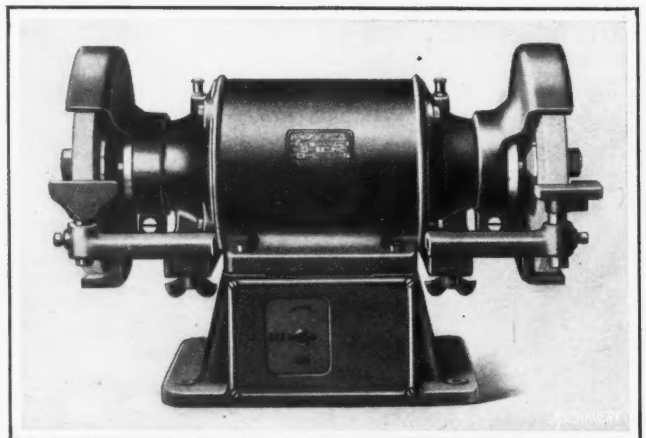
Hisey-Wolf Bench Grinding Machine of Improved Design
